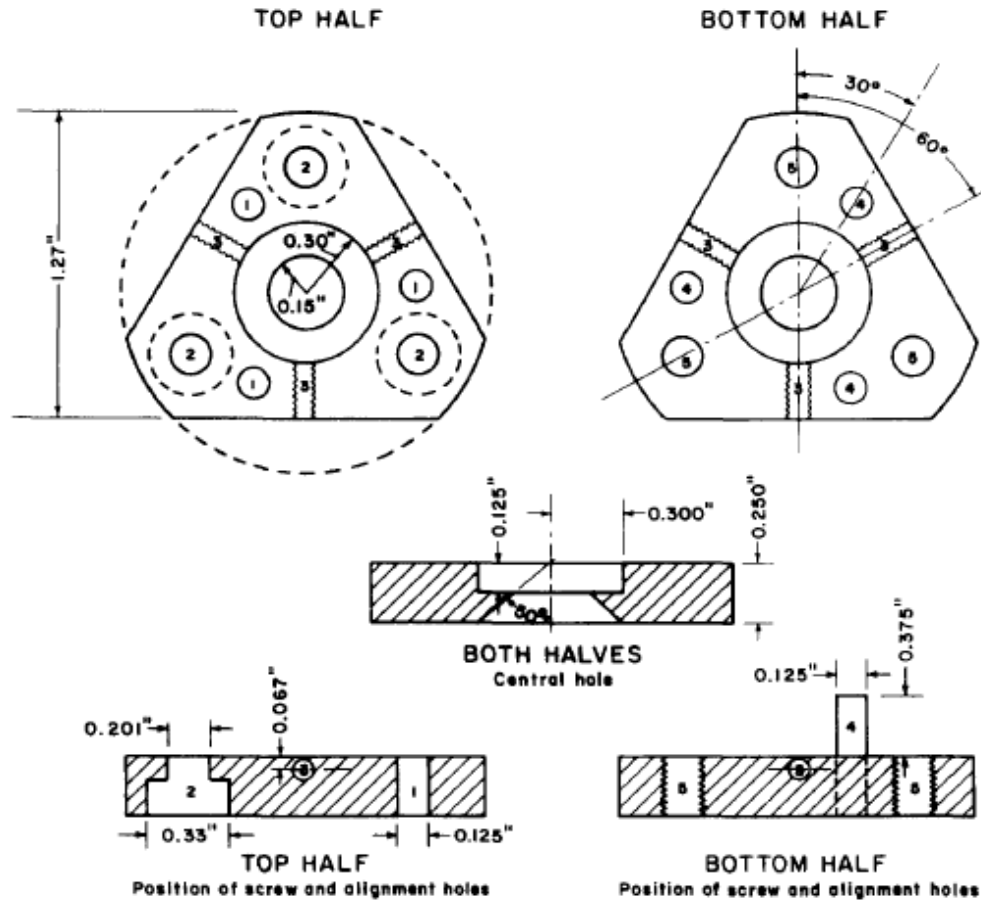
Triangular steel supports. Both halves have three-fold symmetry. (1) 0.318 cm hole for guide pin; (2) Well for Allen cap screws, i.d. = 0.51 cm, o.d. = 0.84 cm; (3) Tap for No. 3-48 screw; (4) Guide pin, 0.318 cm diameter; (5) Tap for No. 10-32 screw [123].
